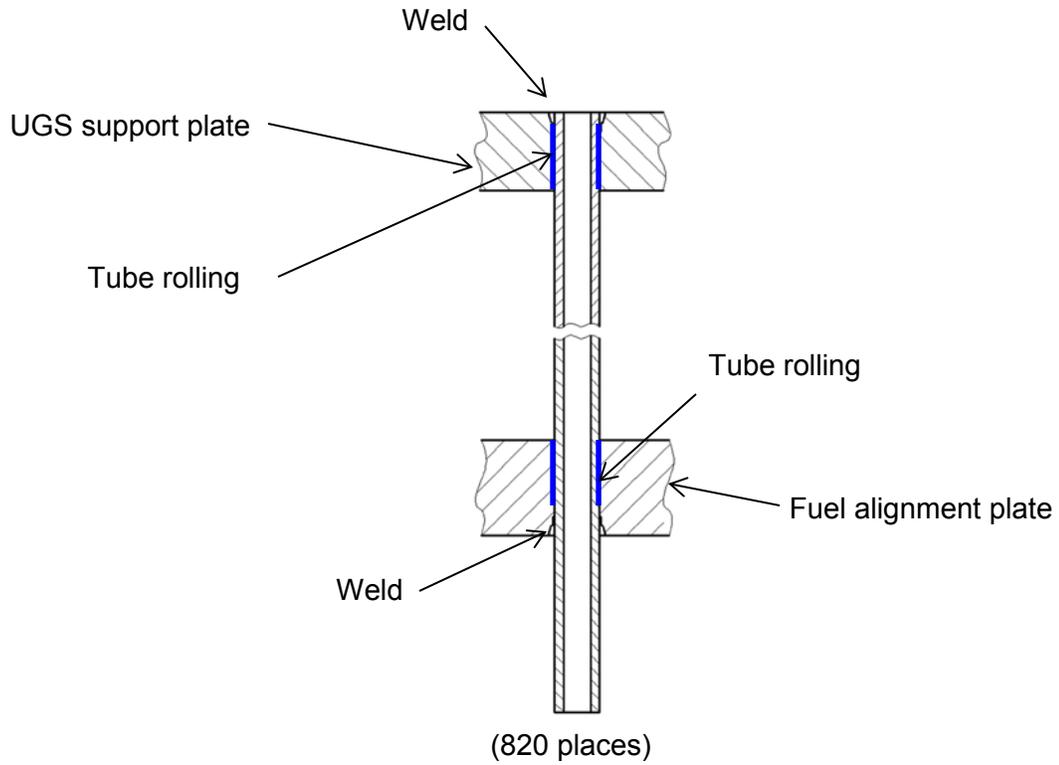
CEA guide tube to UGS support plate and fuel alignment plate interface
